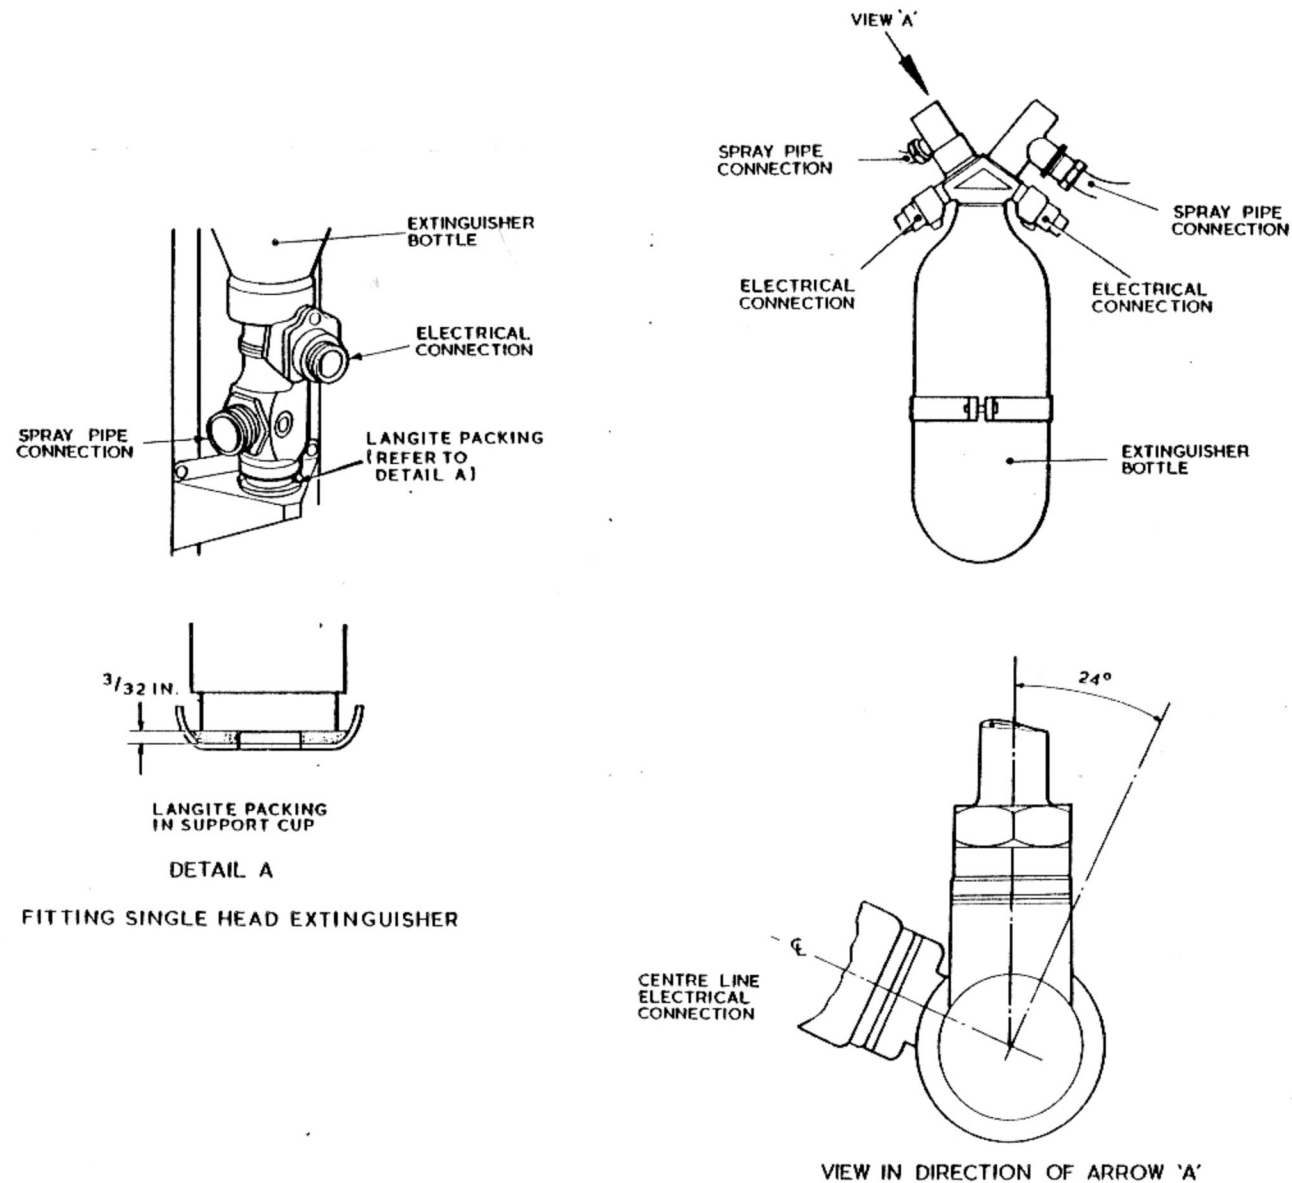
FITTING SINGLE-HEAD EXTINGUISHER AND SETTING DUAL-HEAD JUNCTION BOX
